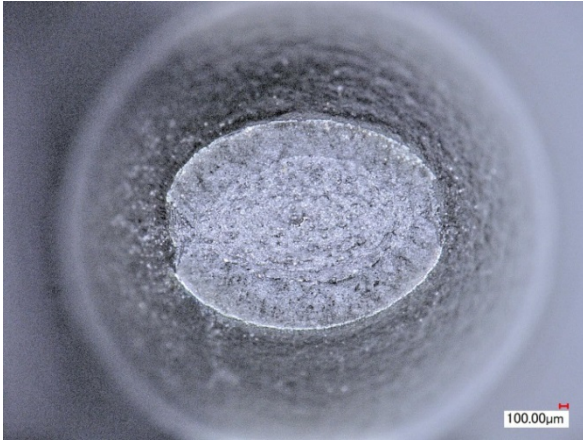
Fracture surface for expanded and strain-aged circumferential tensile test specimen 90° from weld seam.
